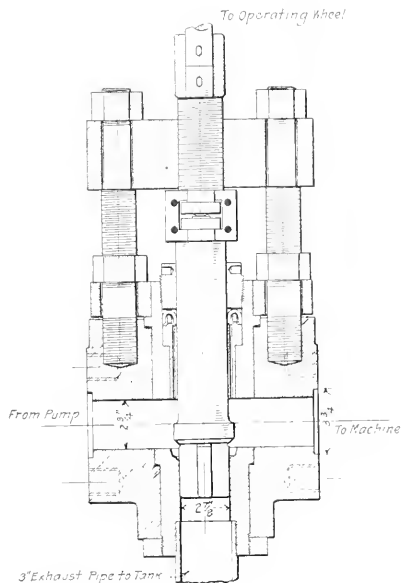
OPERATING VALVE FOR 7500 LB. PER SQ. IN.
